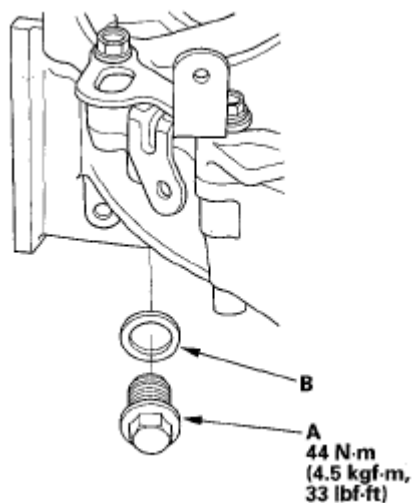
Identifying Transmission Hanger, Bolt And Washer With Torque Specification
